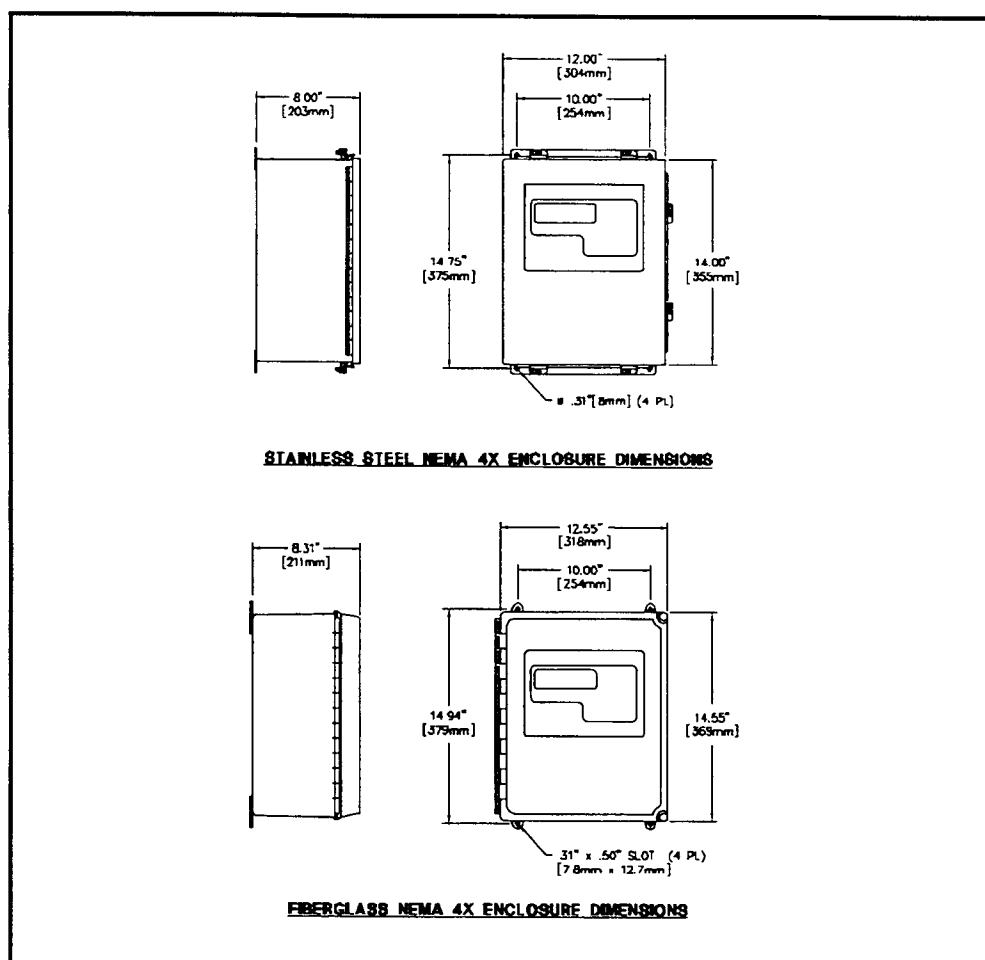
Multi-Vessel System/2 Mounting Dimensions.
